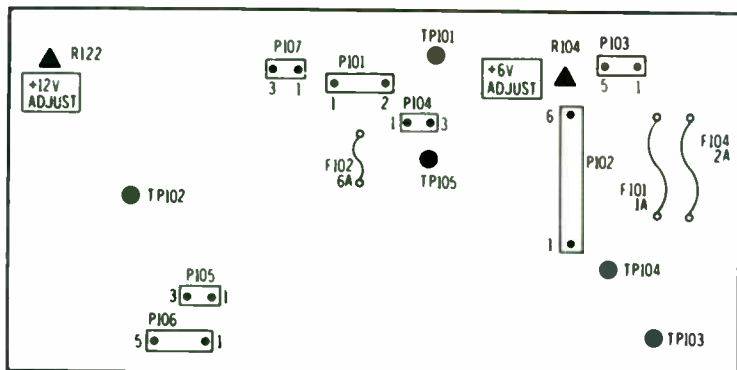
Power supply pc board component side view (courtesy of General Electric).
